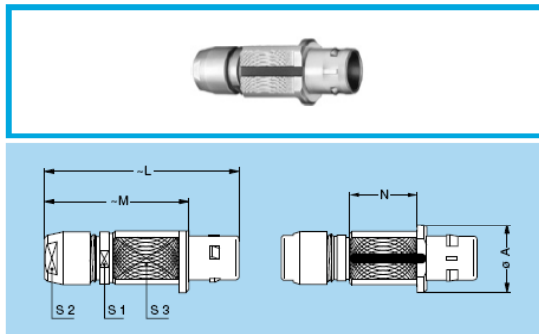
FIG Straight plug for remote handling, key (G) or keys (A...L and R), special alignment mark, knurled handling surface, cable collet
